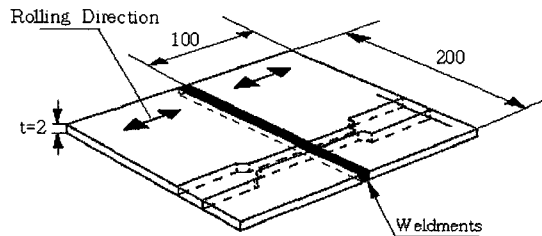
The weld coupon and the extraction of the transverse-weld tensile specimens.
